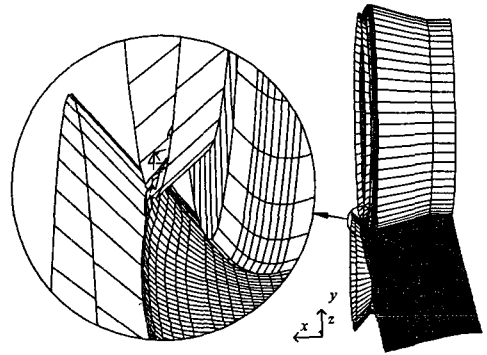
Deformed shape of the strip when its front enters the 3rd stand with TYPE I forming rolls
